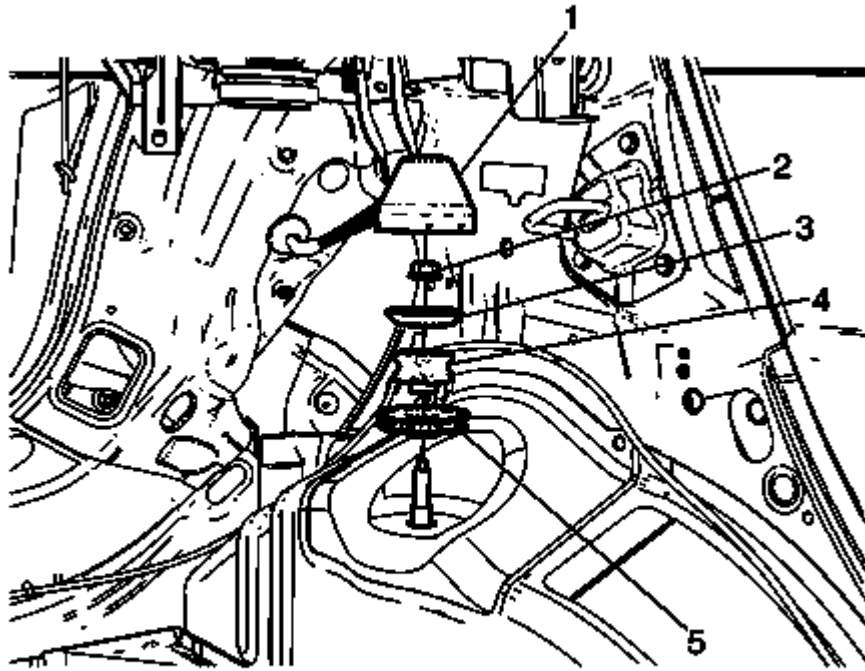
Upper Mounting Plate And Upper Mount Assembly
